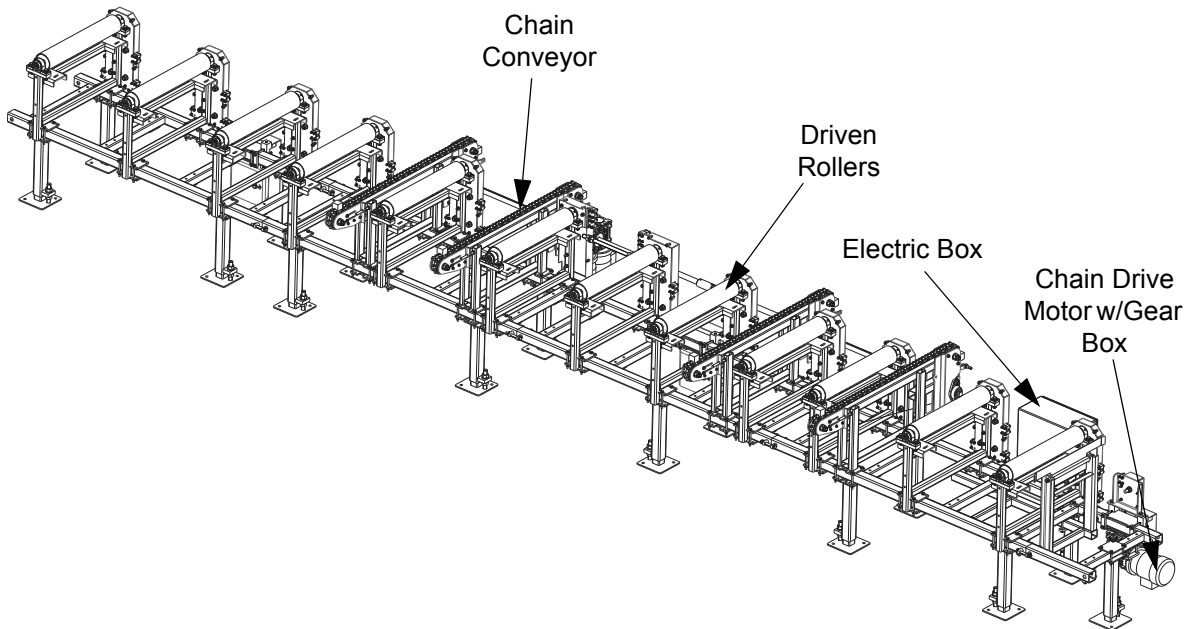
CR6-3.6 OUTFEED CONVEYOR WITH CR1 EXTENSION
